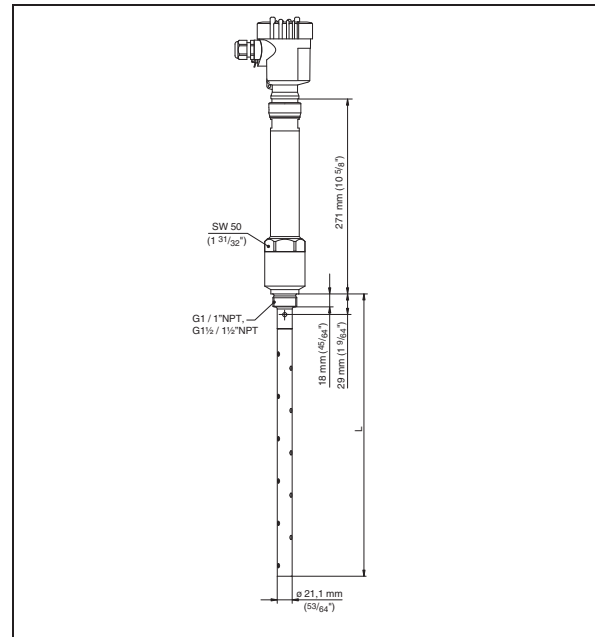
VEGAFLEX 67 - coax version with thread (-110 ... +400 °C/-166 ... +752 °F)
